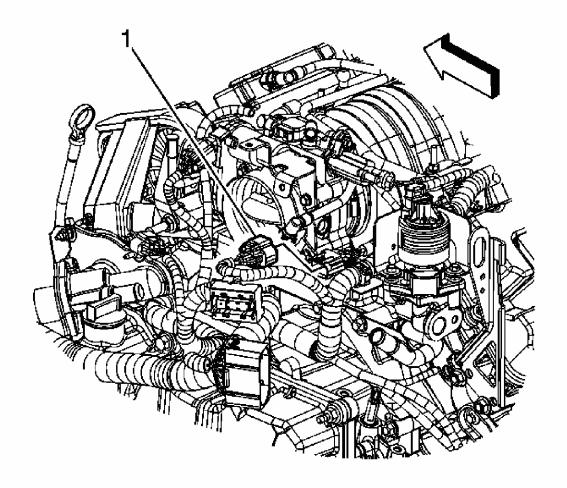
View Of Engine Harness Electrical Connectors Courtesy of GENERAL MOTORS CORP.
